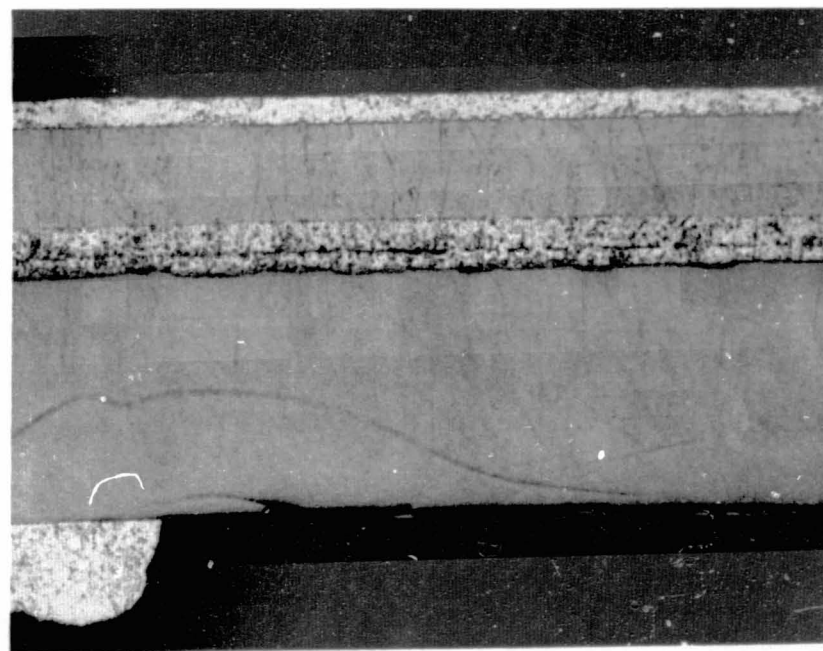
Joint No. 21, Cross Section of Cell Rear-Contact Weld
